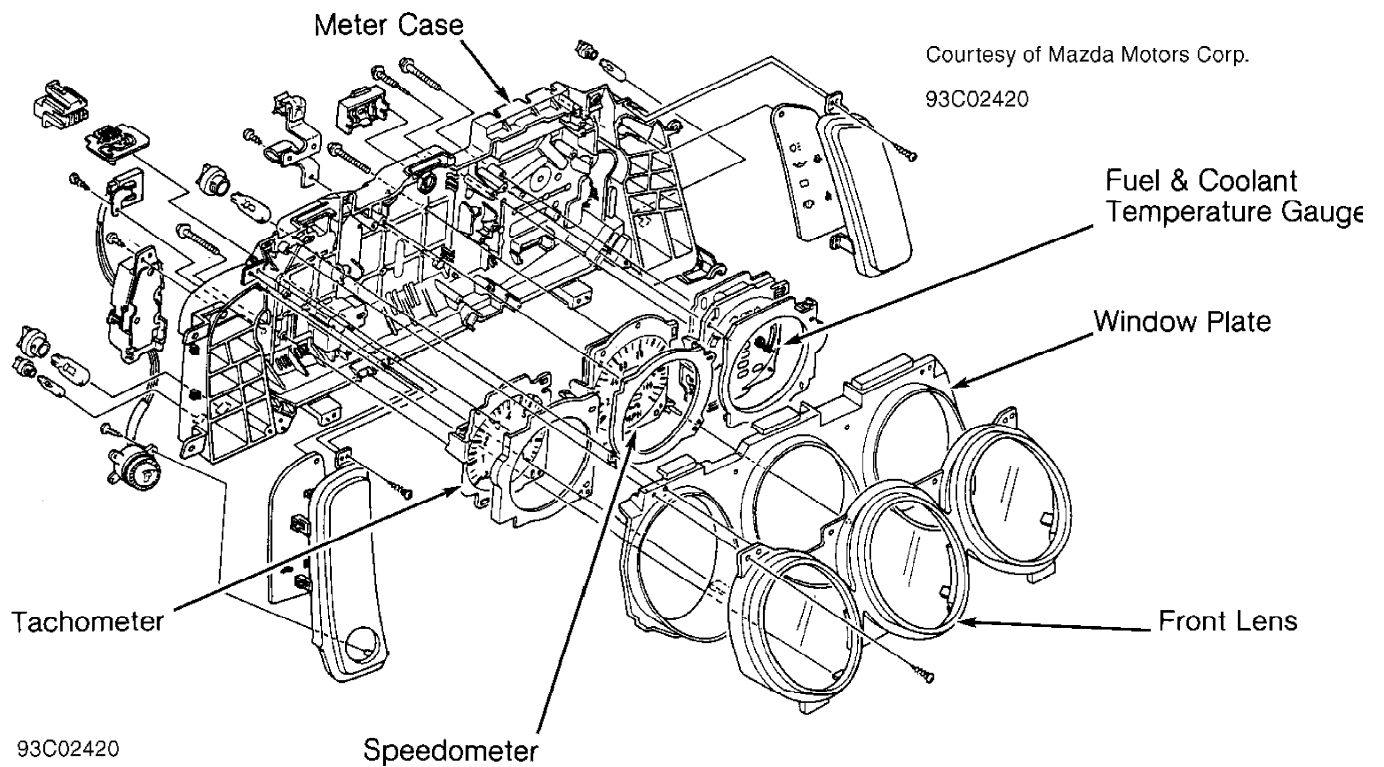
Exploded View of Instrument Cluster (1992 929)
